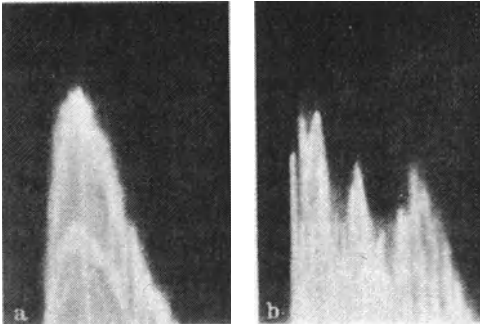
Envelopes of flaw echoes. a 3-mm borehole parallel to test surface; b crack in a 35 mm thick welded joint, probe 4 MHz, 70°
